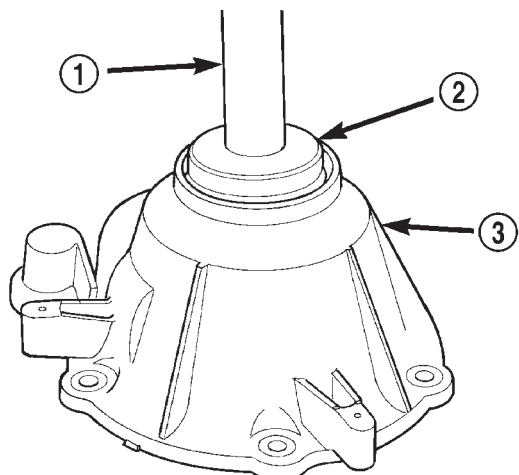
Installing Rear Bearing In Retainer 800bdfa9
